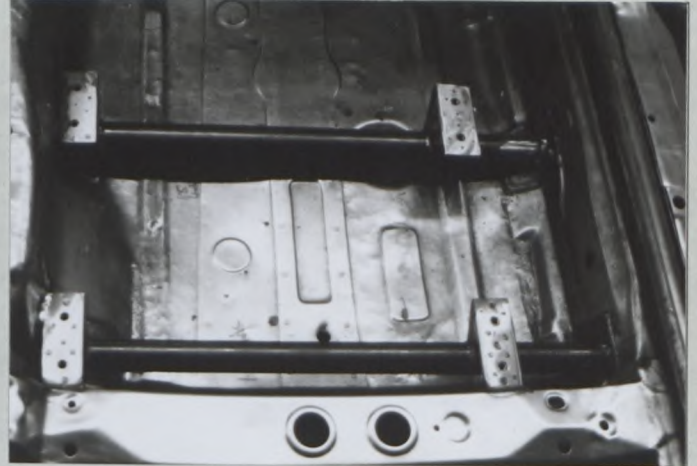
(SEATS ANCHORAGE POINTS)
